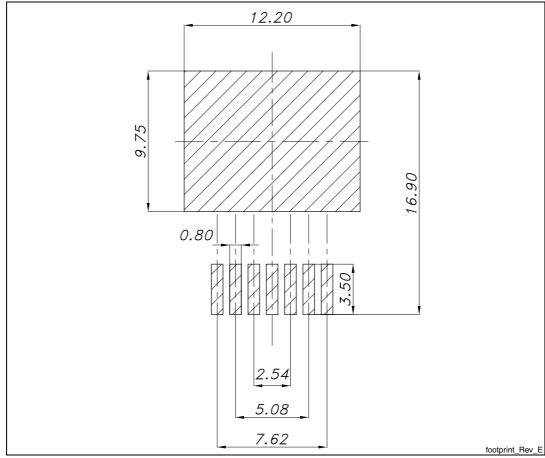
H²PAK-6 recommended footprint (dimensions are in mm)
